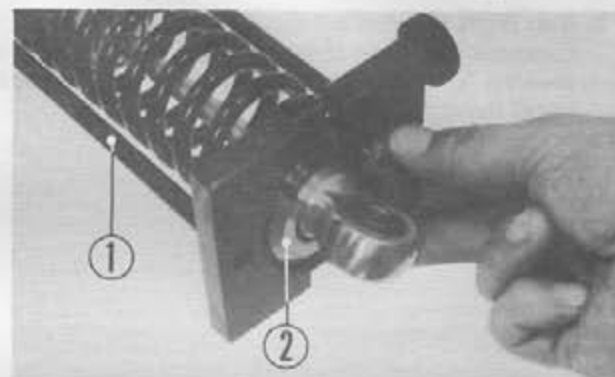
① Rear shock absorber compressor ② Spring set stopper
